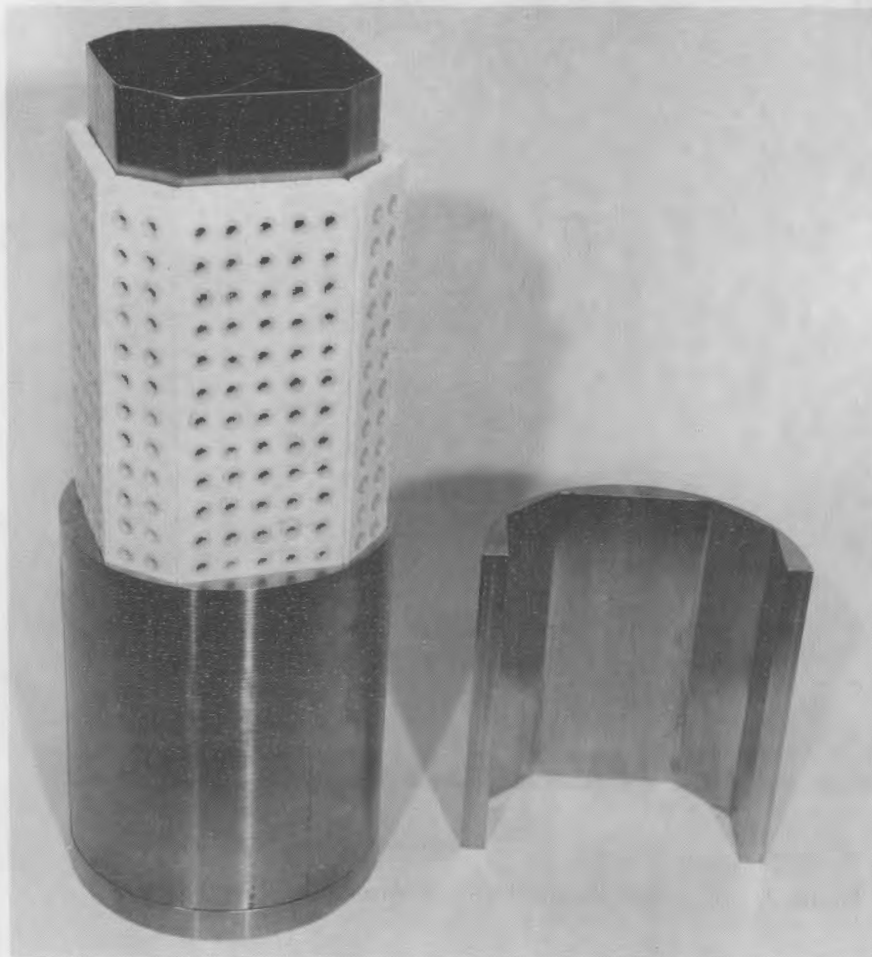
Composite Insulated Shroud System for PBF Severe Fuel Damage Test Train Assemblies
